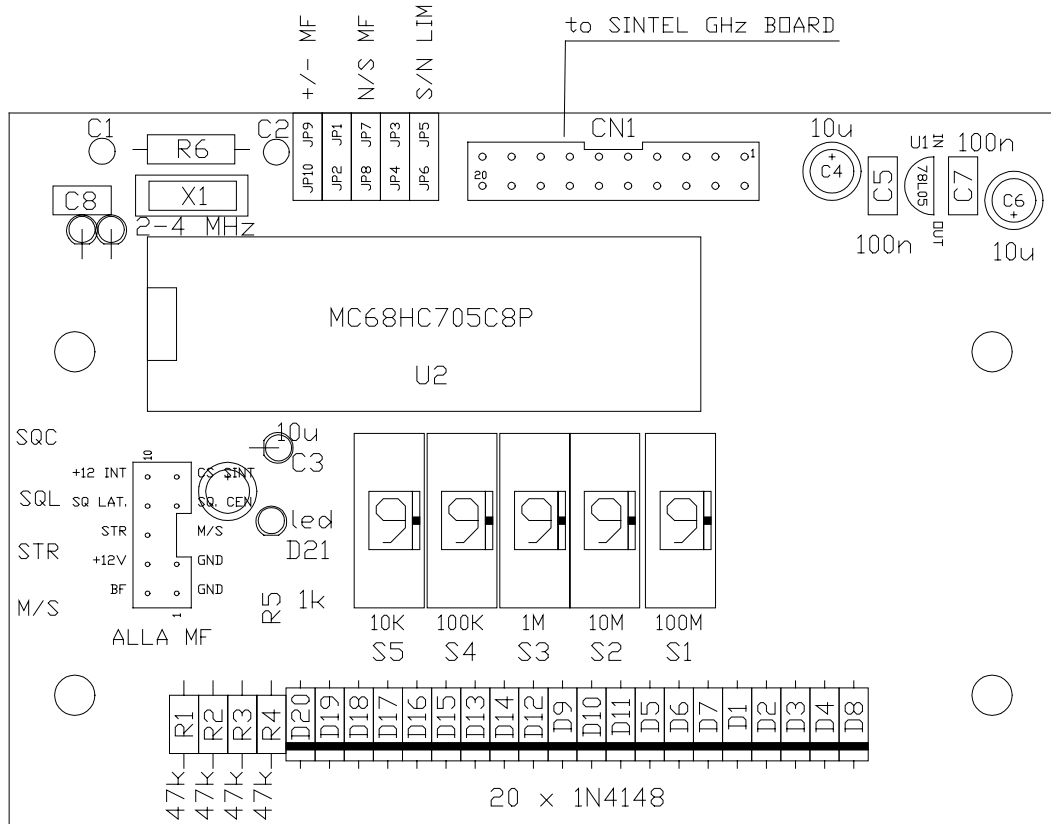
CONTRAVES BOARD COMPONENT LAYOUT (DB 9308-020)
